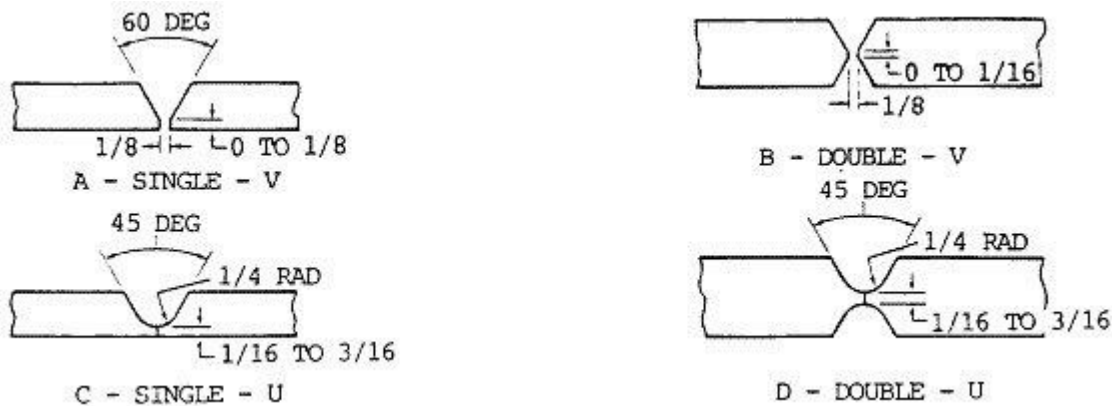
Heavy Section V and U Butt Joint Weld
